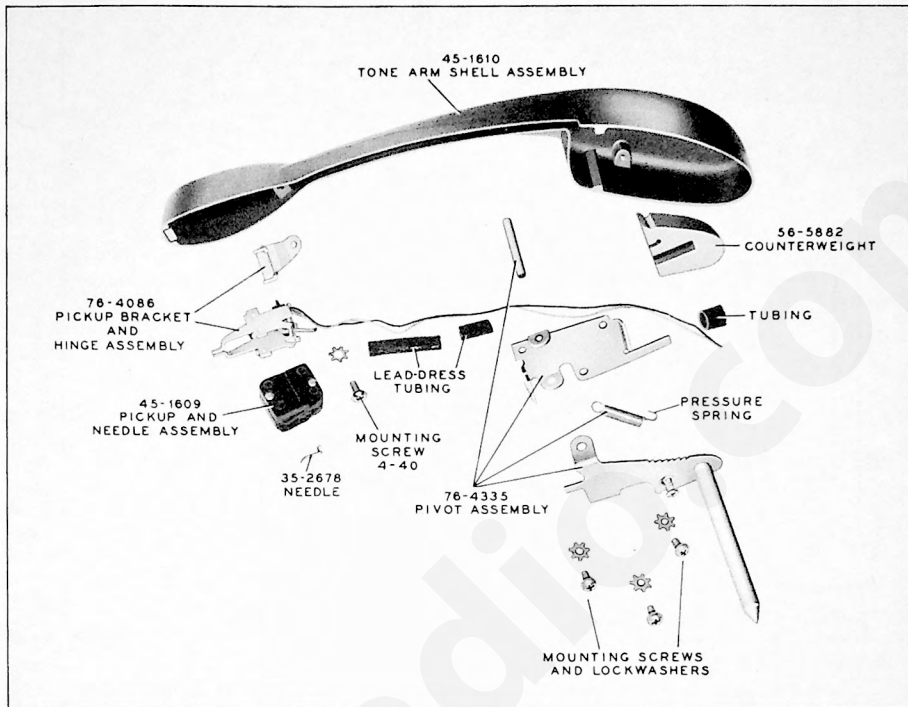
Record-Player Tone-Arm Assembly, Part No. 35-2686
